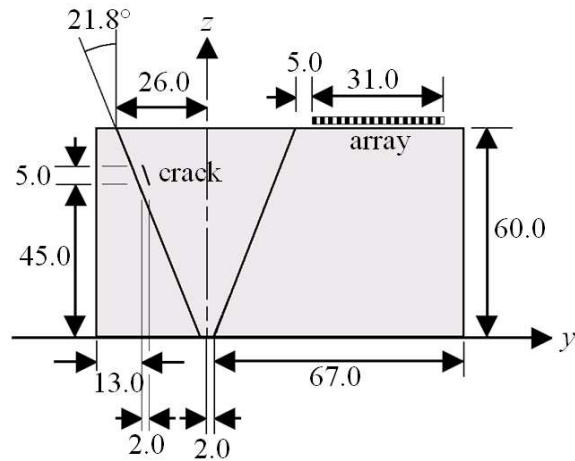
Geometry for the imaging of a crack-like defect whose ends are at (-16,45)mm and (18,50)mm, using full-skip SH wave inspection. Dimensions in mm.
